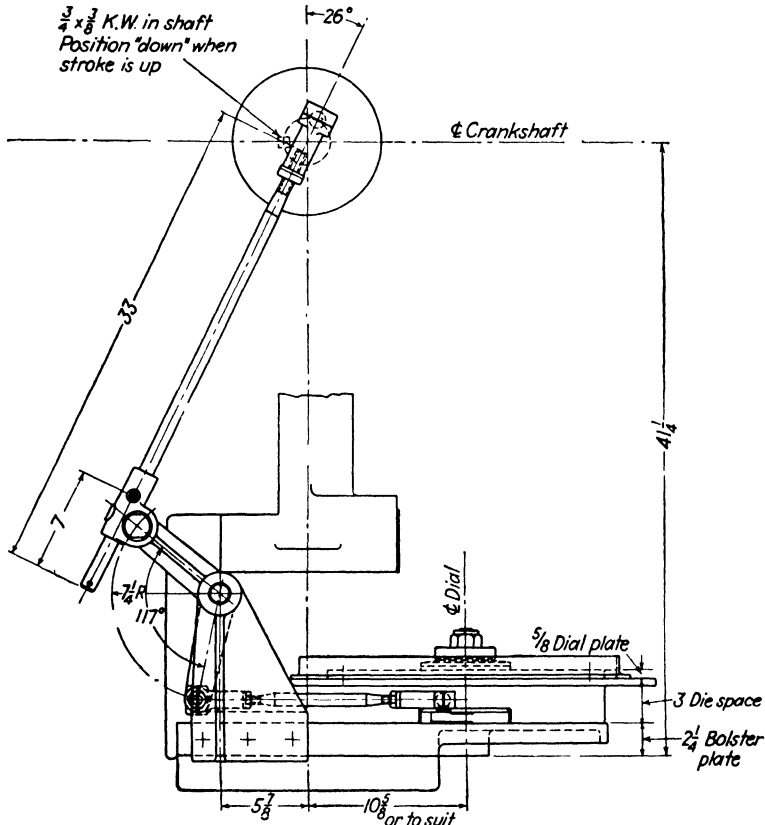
Left-hand projection of the lower view shown in Fig. 136A.
